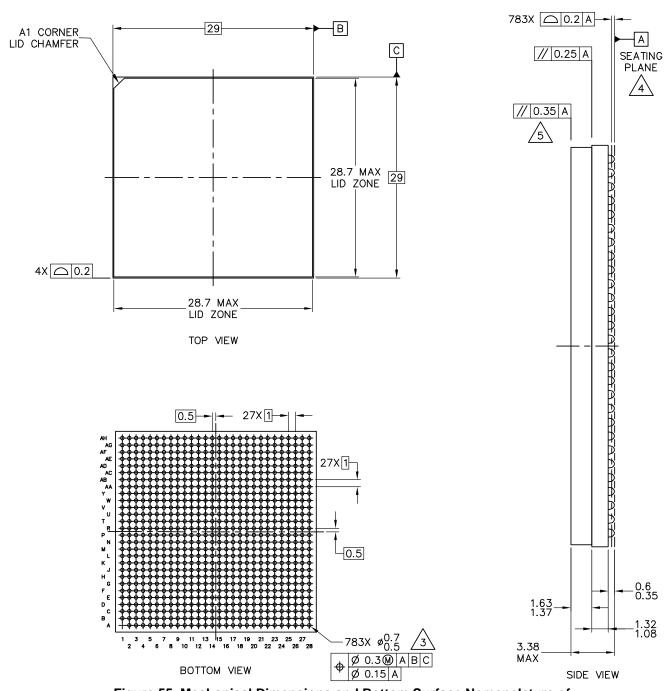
Mechanical Dimensions and Bottom Surface Nomenclature of the HiCTE FC-CBGA and FC-PBGA with Full Lid
